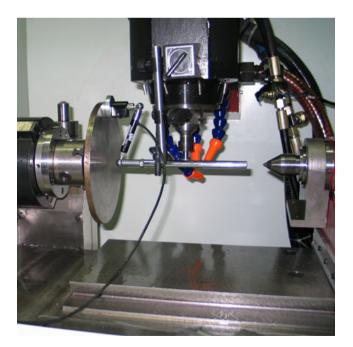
Measurement of A-rotary joint in five-axis turbine blade grinding machine
